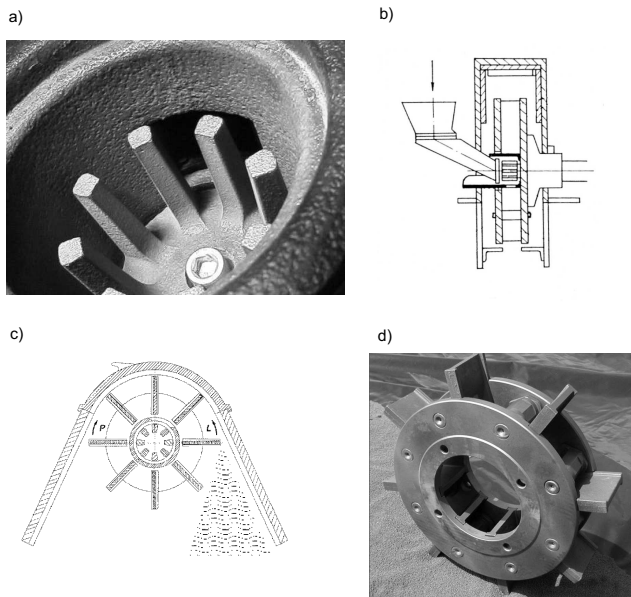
Throwing unit in an experimental shot-blasting machine [1, 4]: a) barrel and an adjusting sleeve, b) schematic diagram of a throwing unit; d) blast wheel with paddles
